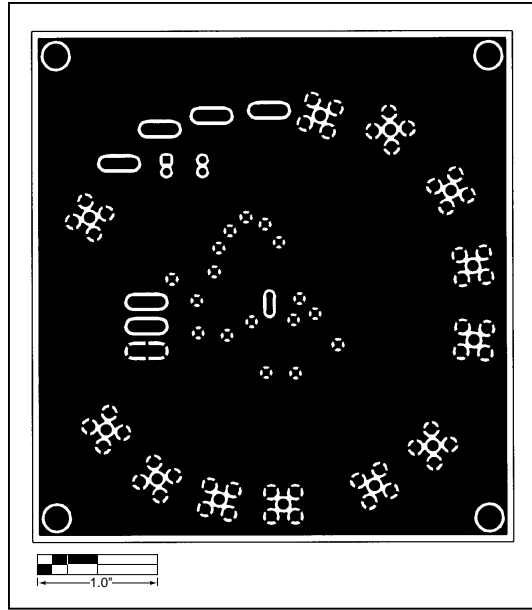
MAX498 EV Kit PC Board Layout—Solder Side (5/8x scale)
